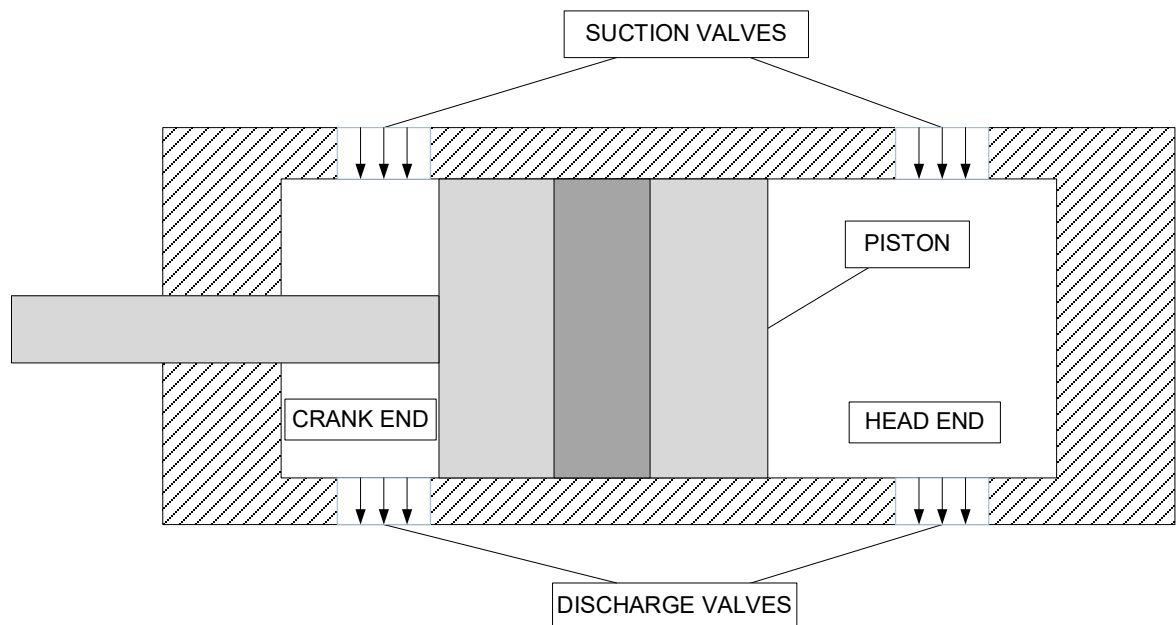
Basic Diagram of Reciprocating Compressor Cylinder.
